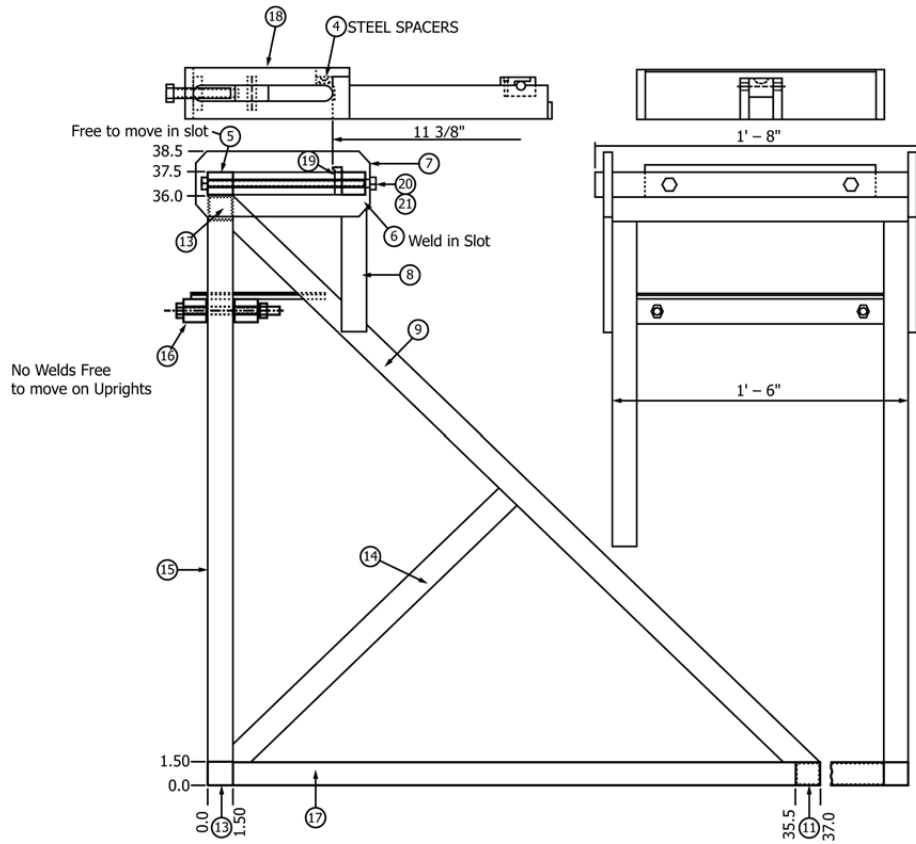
ASTM C1072-13 Bond Wrench Frame and Elevation
